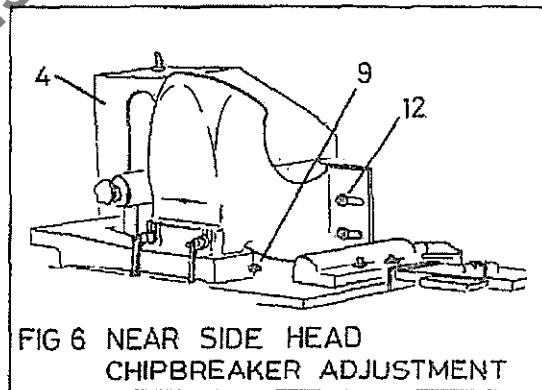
NEAR SIDE HEAD CHIPBREAKER ADJUSTMENT
